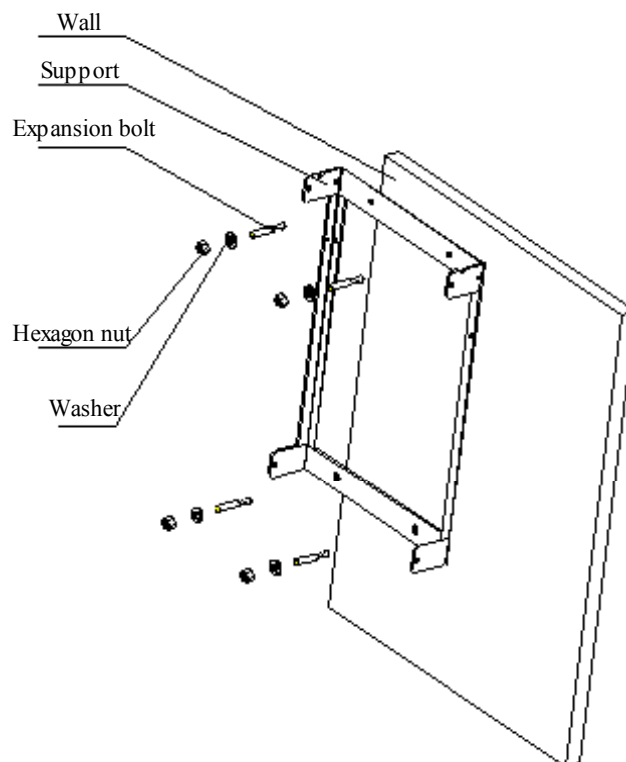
Schematic Diagram of Installing the Support onto the Wall
